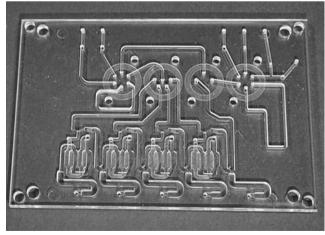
Microfluidic device fabricated using mechanical precision machining. Typical channel dimensions are 800 by 800 μm (courtesy of S. Drese, IMM, Mainz)
